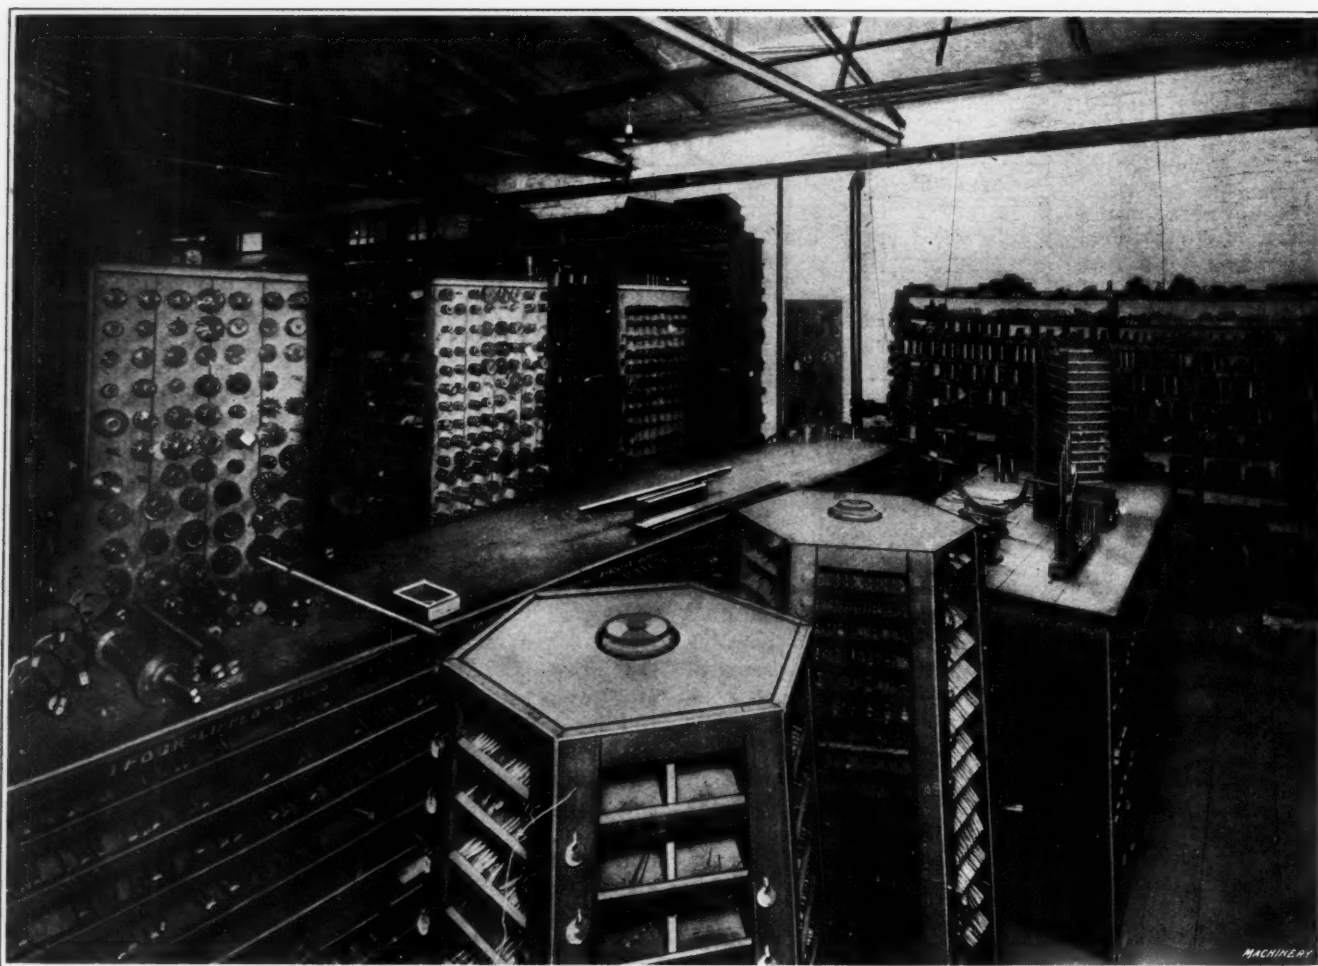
View of Tool-room of Gisholt Machine Co., Madison, Wis., showing Section used for Milling Cutters, Reamers, Drills, Counterbores, Gages, etc. Note Revolving Tool Cabinets in Foreground
